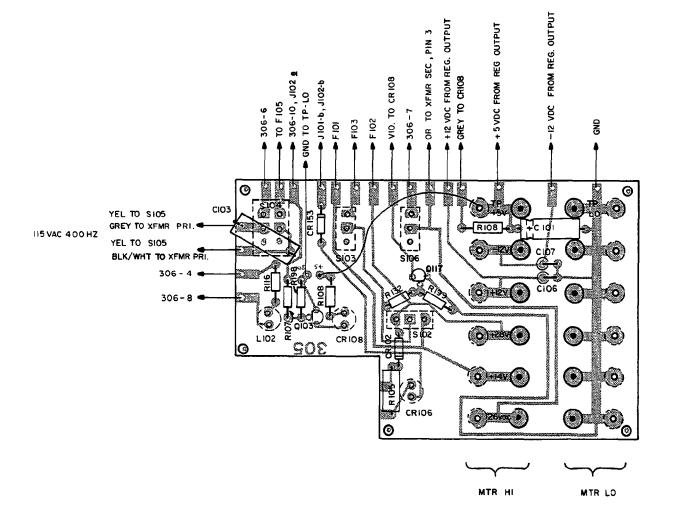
P.C. BOARD ASSEMBLY, BOARD 305, DRAWING (Dwg. 300-05989-0000 Rev. 0)
